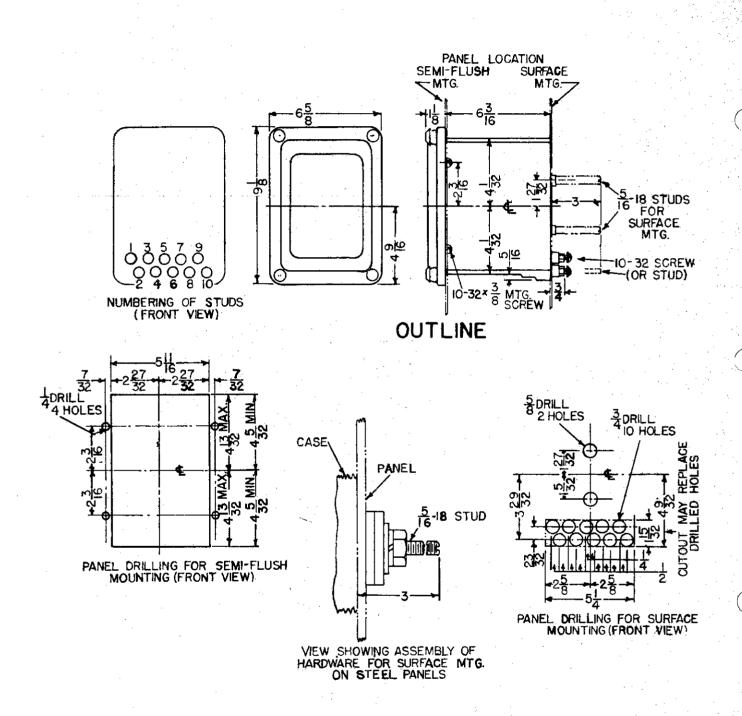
(6209271-3) Outline of Panel Drilling for Drawout Relays.
